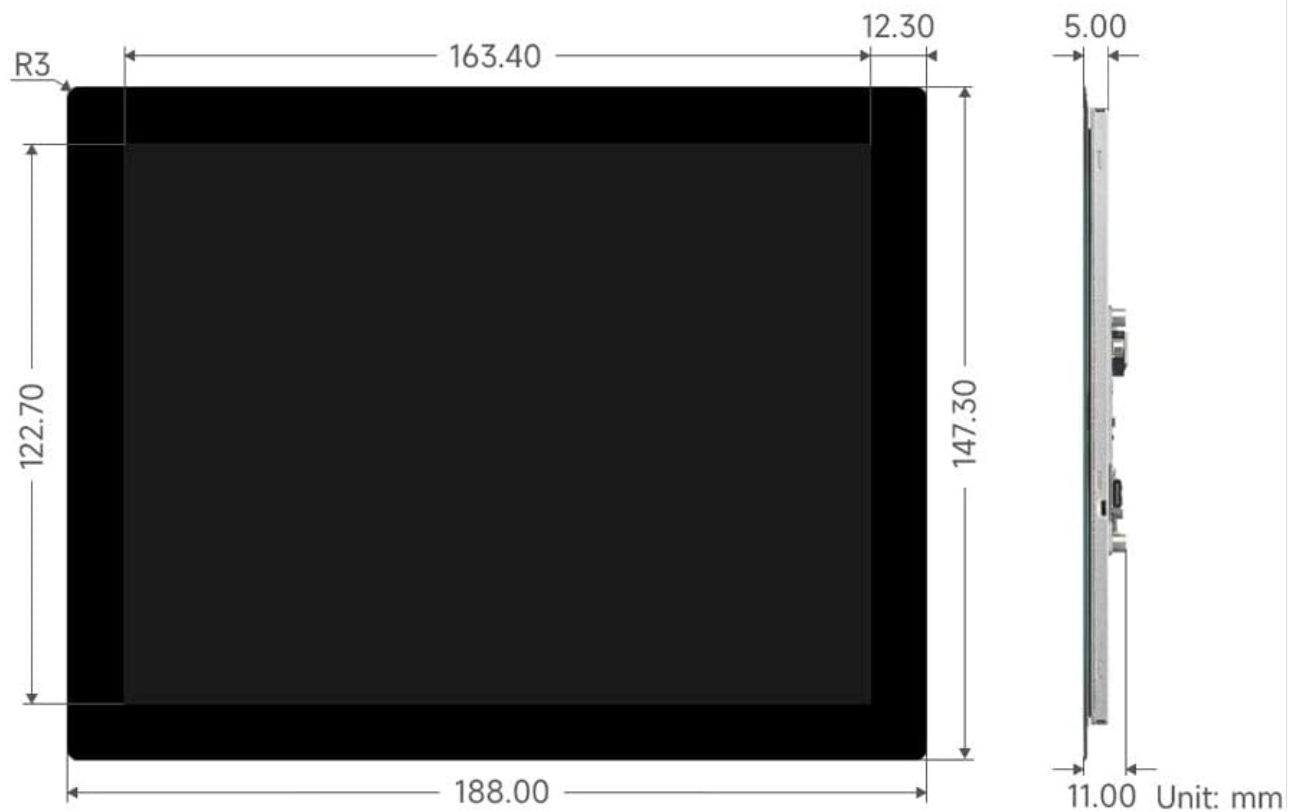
Detailed dimensions of the display unit in millimeters.
